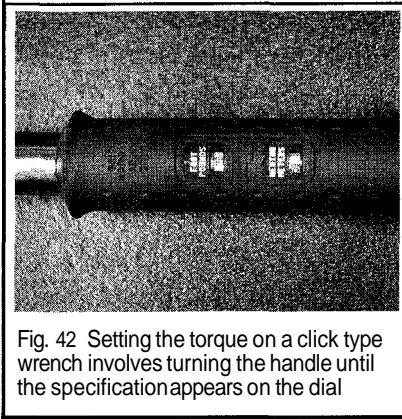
Setting the torque on a click type wrench involves turning the handle until the specification appears on the dial
